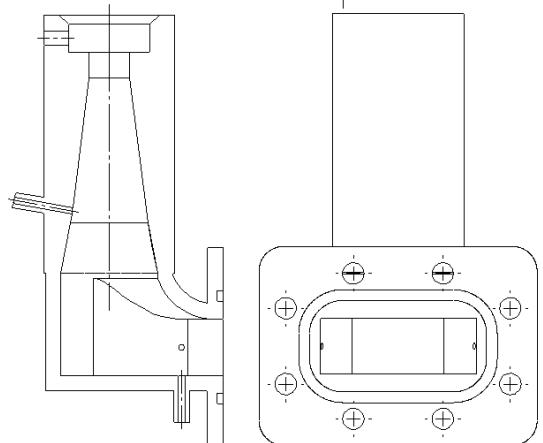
, CAD drawing of side view, showing half of elbow section and a front view, showing the flange design
